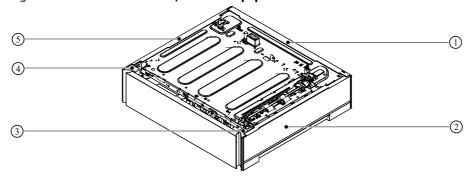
Printed circuit assemblies, printer base (2 of 2)
